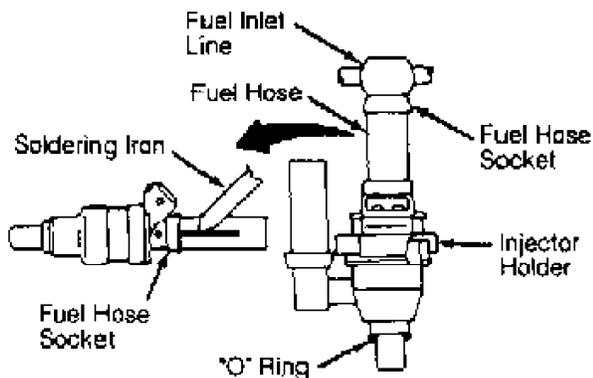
Removing Fuel Injector Assembly & Fuel Hose (M30)
